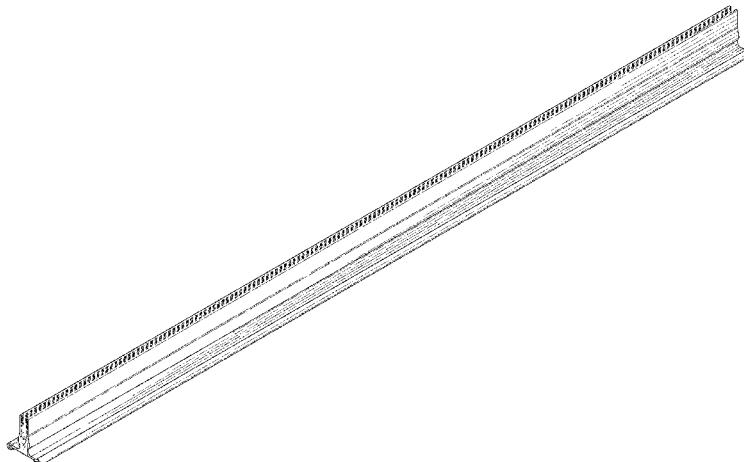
is a left, side view of the lighting module heatsink of FIG. 1;
